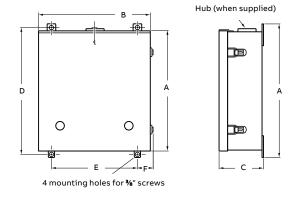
, Enclosed CR360L type 1, 12, 3R, 4/4X 4-point mounting
